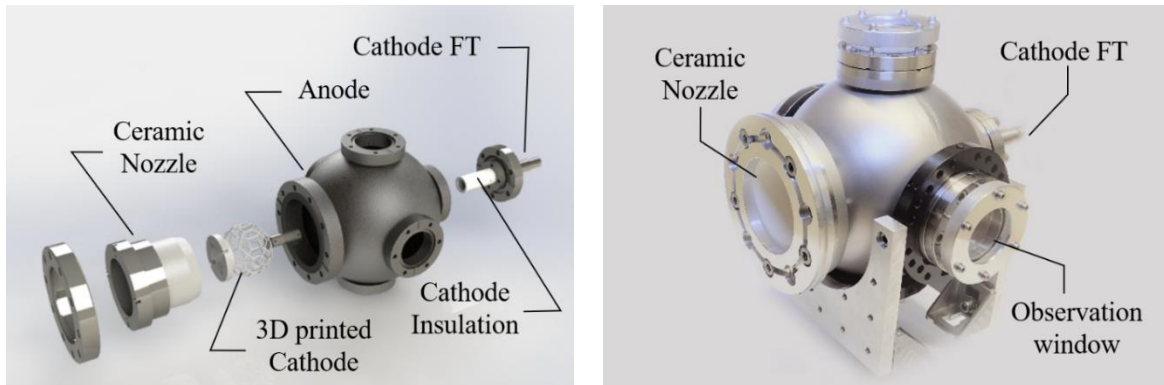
IEC plasma source 3D CAD drawing (left) and assembly (right).
